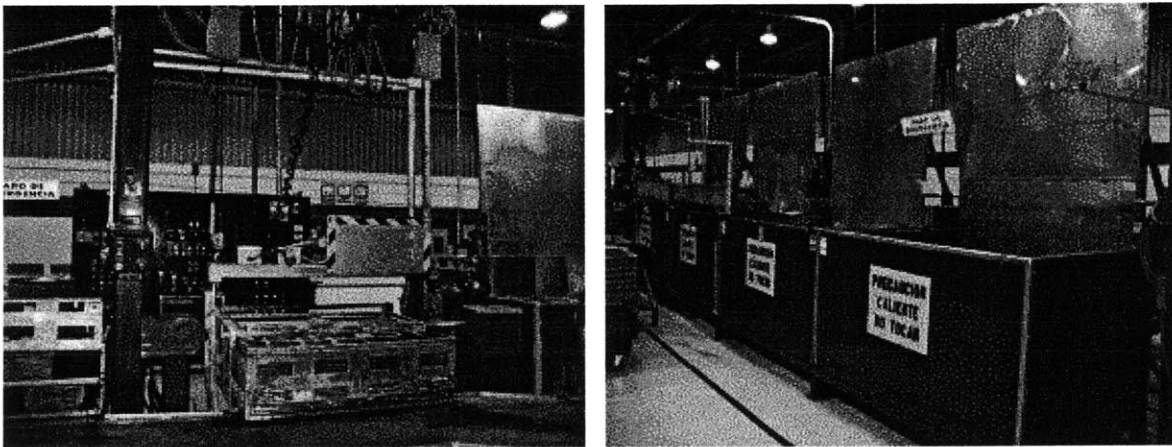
(left) Metal basket that holds parts (b) Washer stations.
